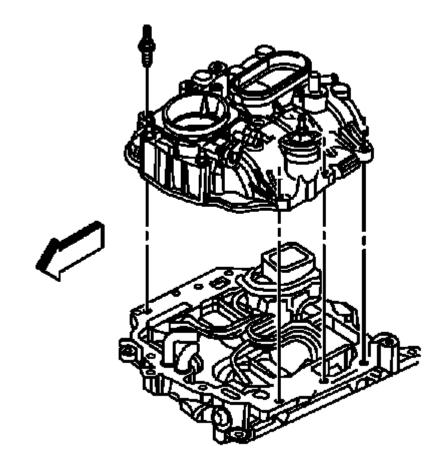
View Of Intake Manifold Upper Studs Courtesy of GENERAL MOTORS CORP.
